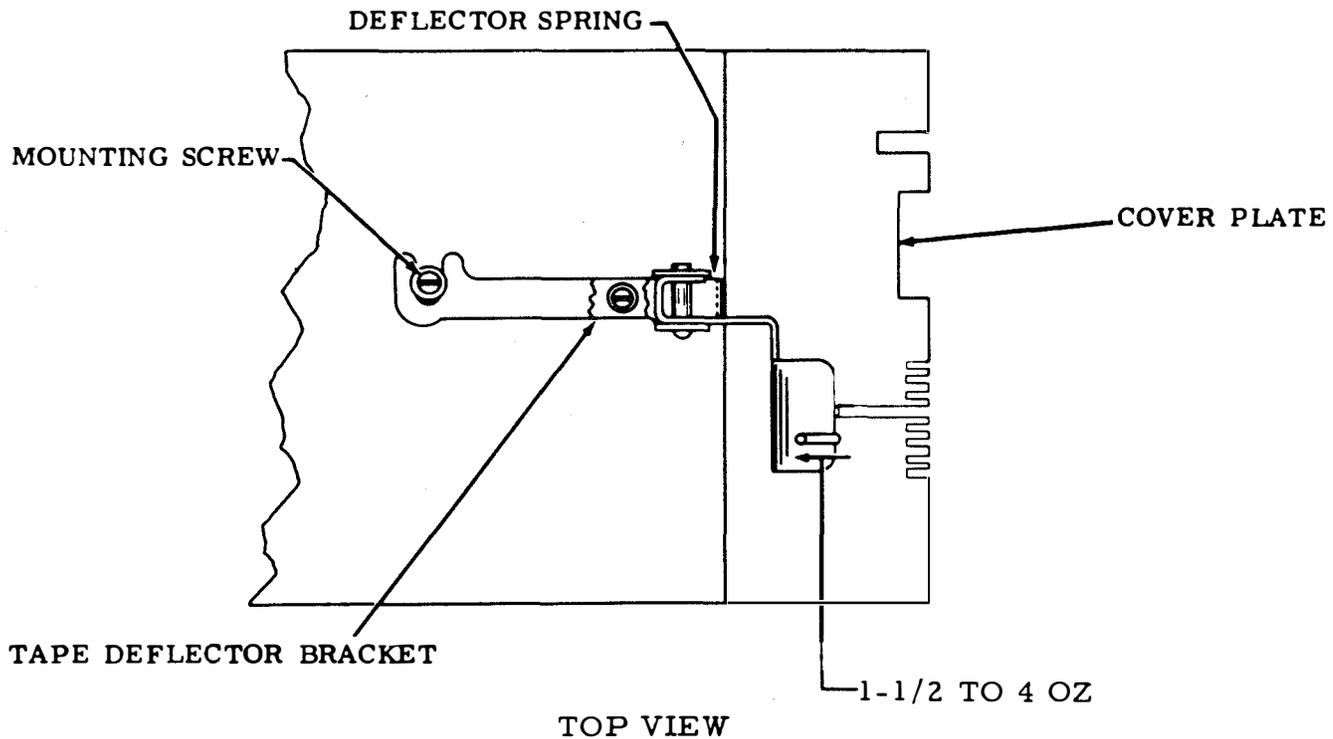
Tape Deflector Bracket and Tape Deflector Spring
